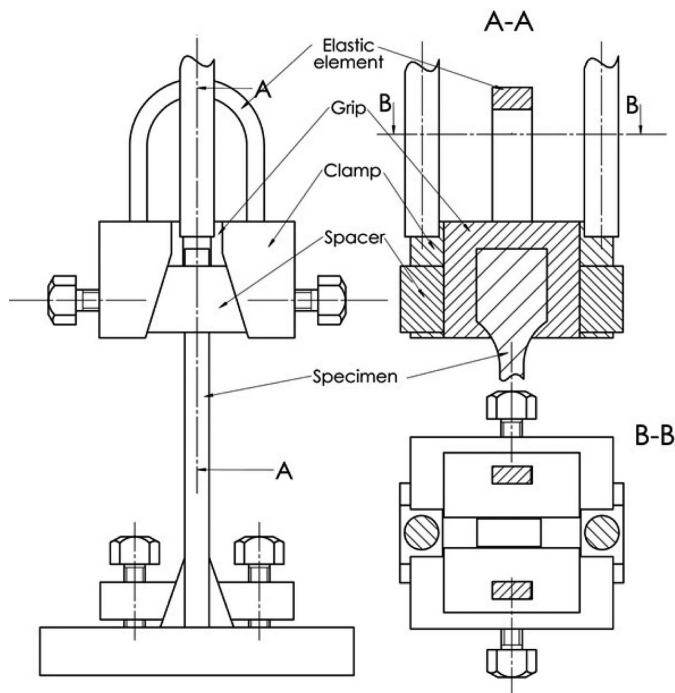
Schematic upper gripping device of tensile testing machine [14]
